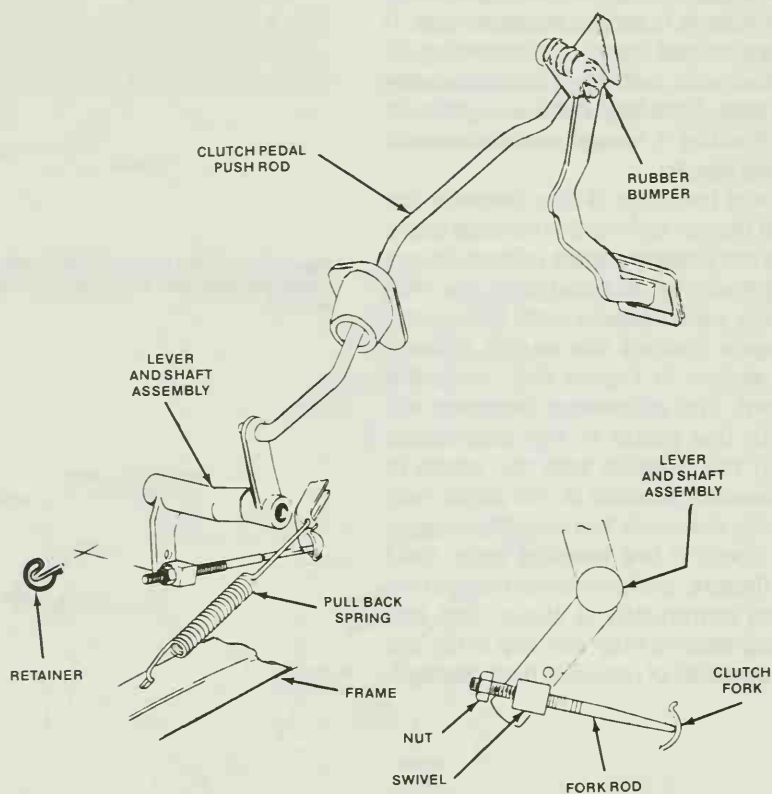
Pedal free play may be adjusted by adjusting the fork rod used to push on the release bearing fork. (Buick Motor Division of General Motors Corporation)
